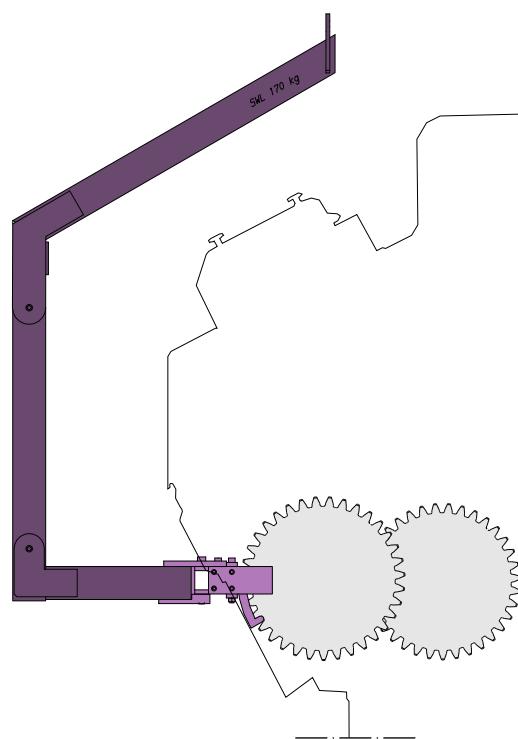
Lifting tool 836 020 for camshaft gear wheel
